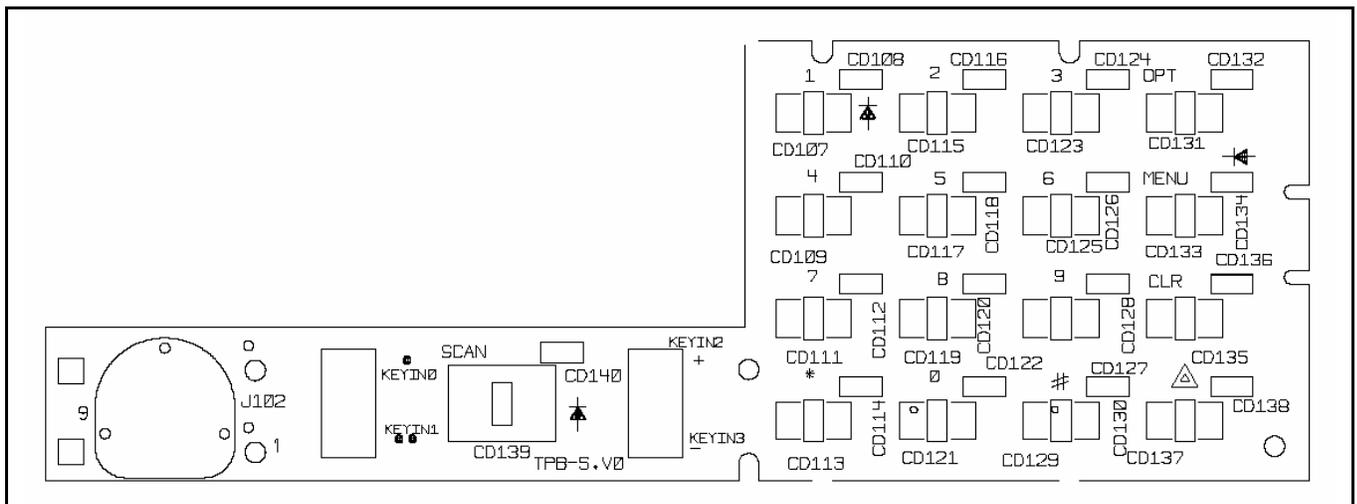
Switch Circuit CDF-368MC Solder Side
